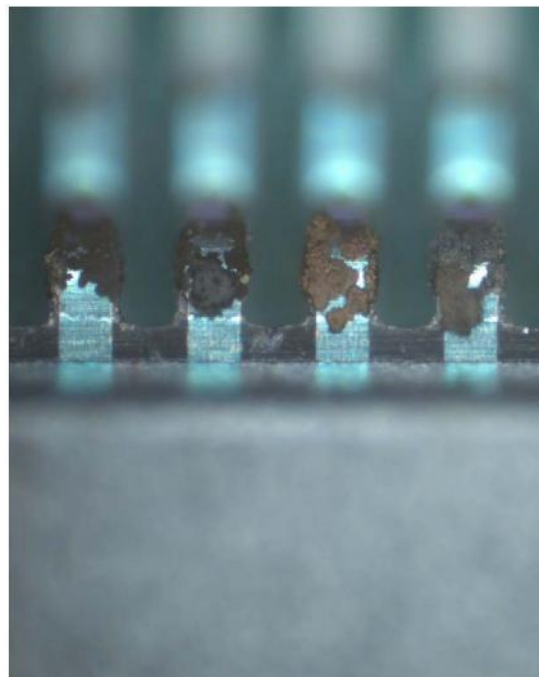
ALD coating showed the second most coverage of corrosion on the terminal surface.
